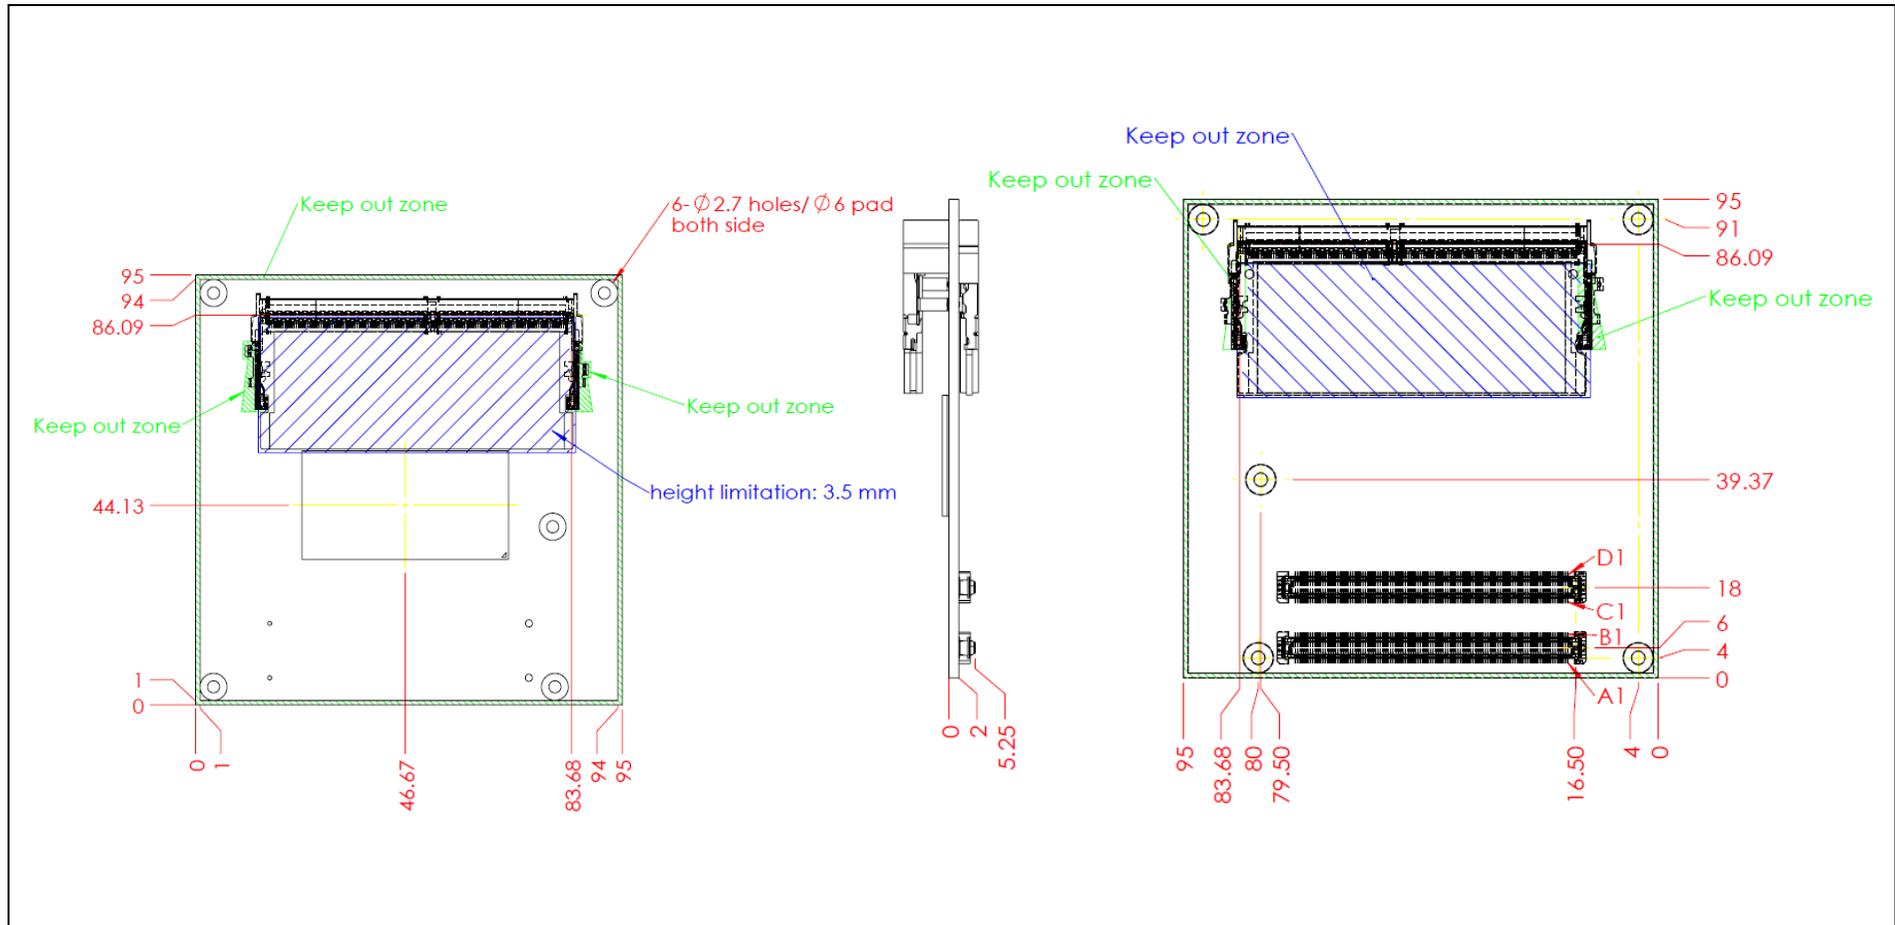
Mechanical Dimensions - Top & BOT & Assembly
